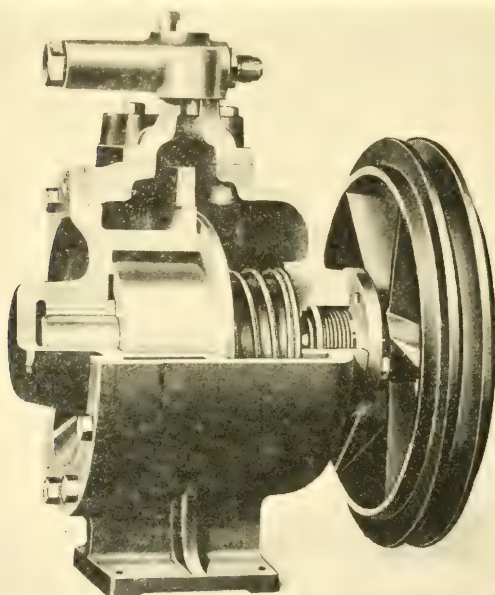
NORGE ROTARY TYPE COMPRESSOR.
